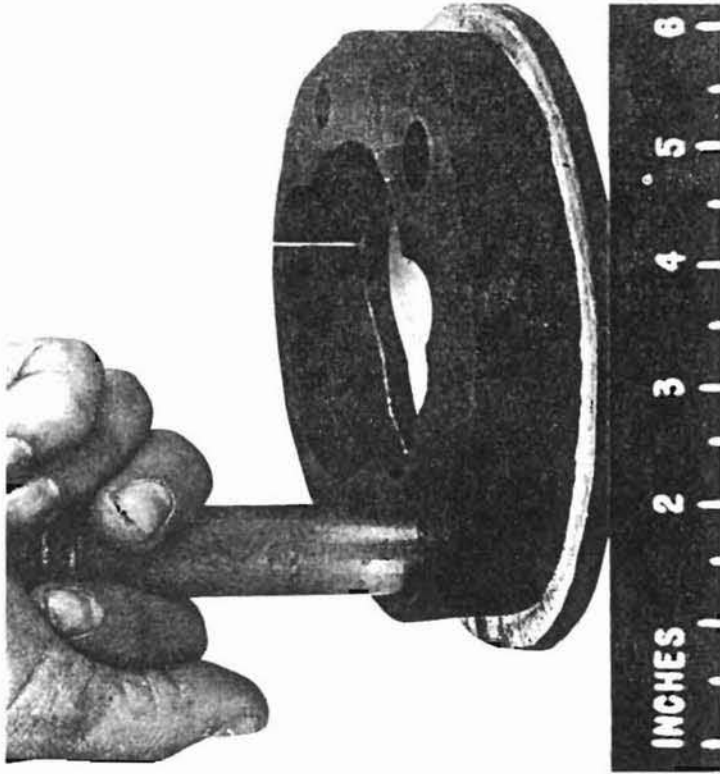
Boring an end cap for exhaust port tubes.
